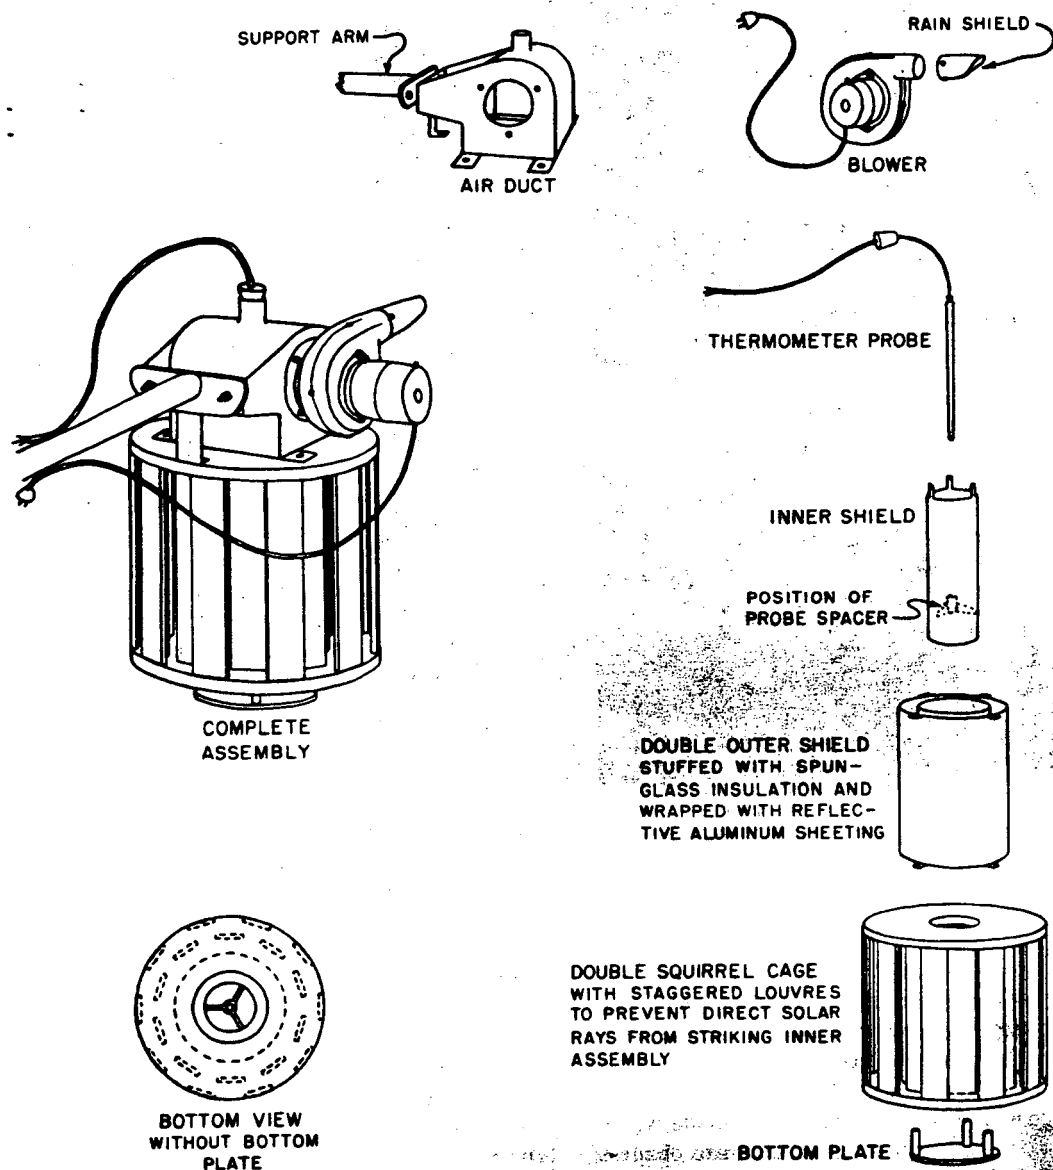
Aspirated electrical resistance thermometer assembly.
